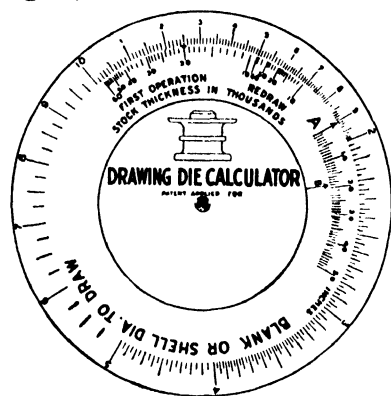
Revolving dials are employed in this circular slide rule for determining correct reductions of diameters for drawing and redrawing cylindrical shells.
